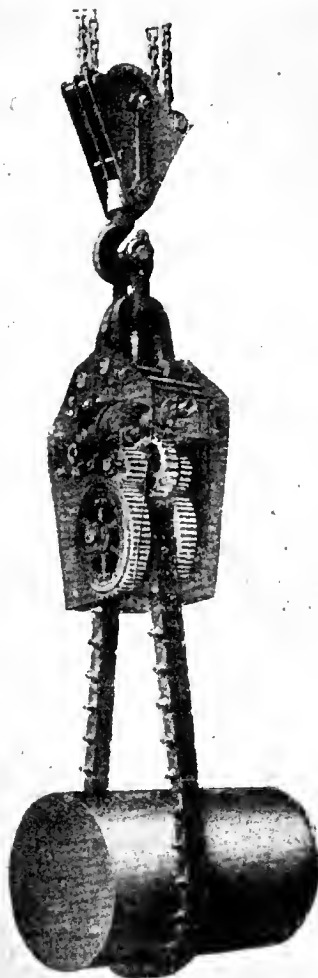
ELECTRICALLY-DRIVEN TURNING GEAR FOR ROTATING TURNINGS.
